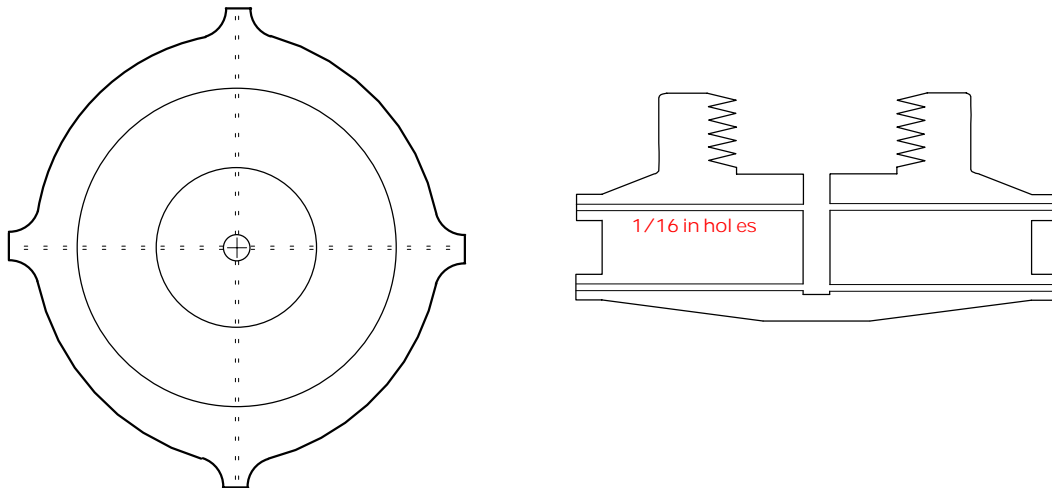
B4.8 Impeller Head Used in Trials at Alcoa Technical Center
